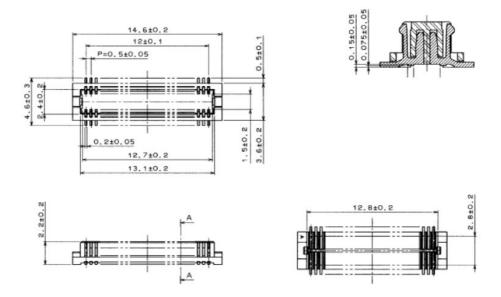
Mechanical dimensions of Hirose DF12C 50-pin receptacle
